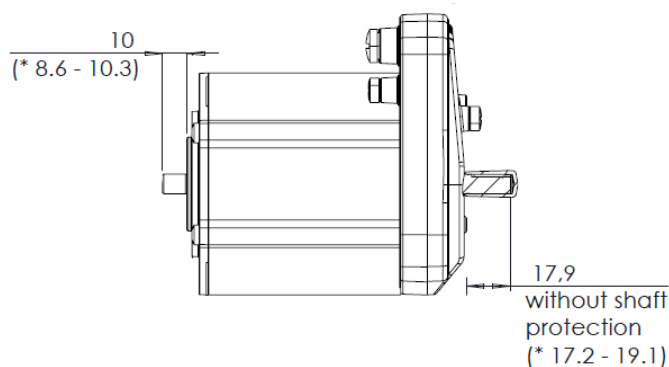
Motor shaft tolerance - SWD® Core (naked)
